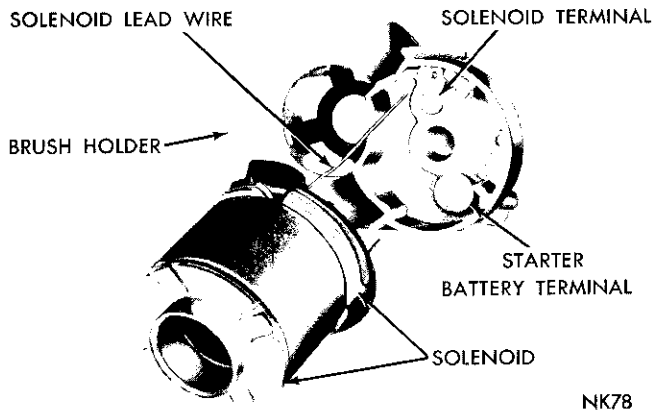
Assembling Solenoid to the Brush Holder Plate
